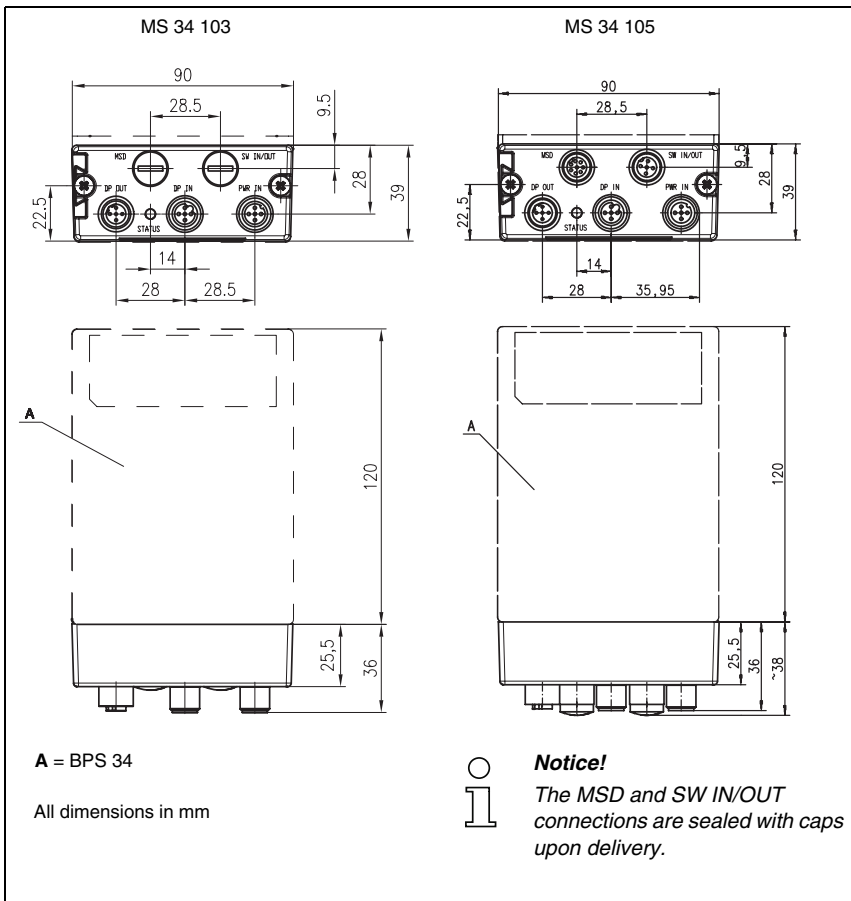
Dimensioned drawing MS 34 103 / MS 34 105
